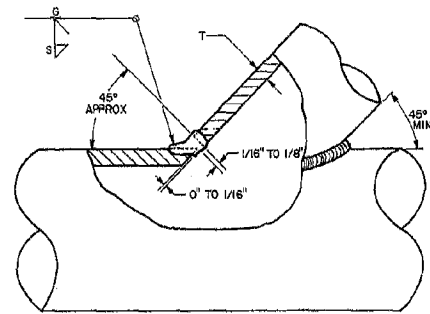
Fillet Welded Internal Root Connection
